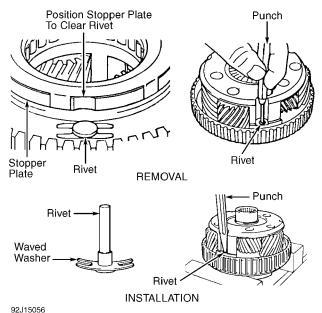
Removing & Installing Planetary Carrier Assembly Rivet Courtesy of Mitsubishi Motor Sales of America.
